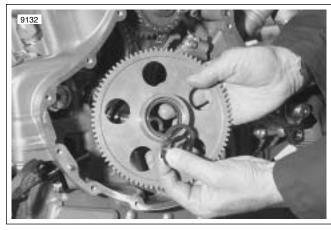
Needle Roller Bearing, Ball Gear, Thrust Washer and Retaining Ring
